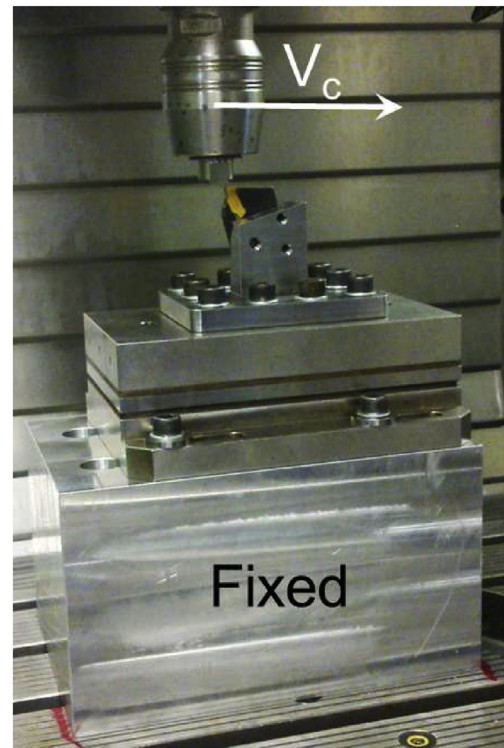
Cutting configuration on the milling machine (Ducobu et al., 2015a).
